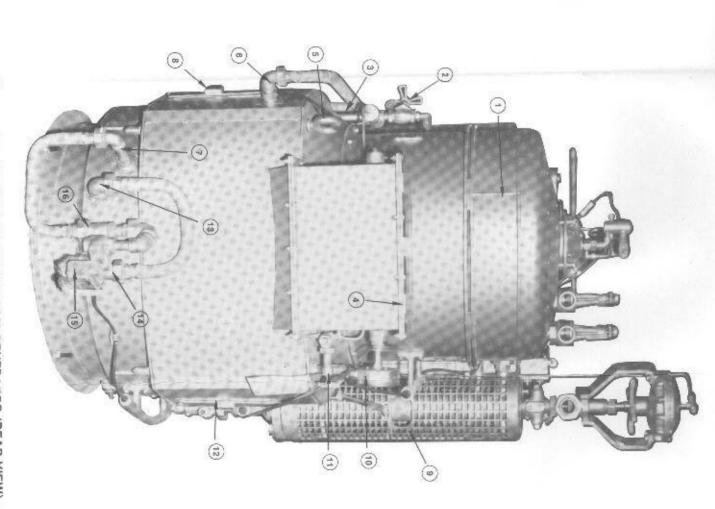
OK-4625-74 LEFT-HAND STEAM GENERATOR (REAR VIEW)
